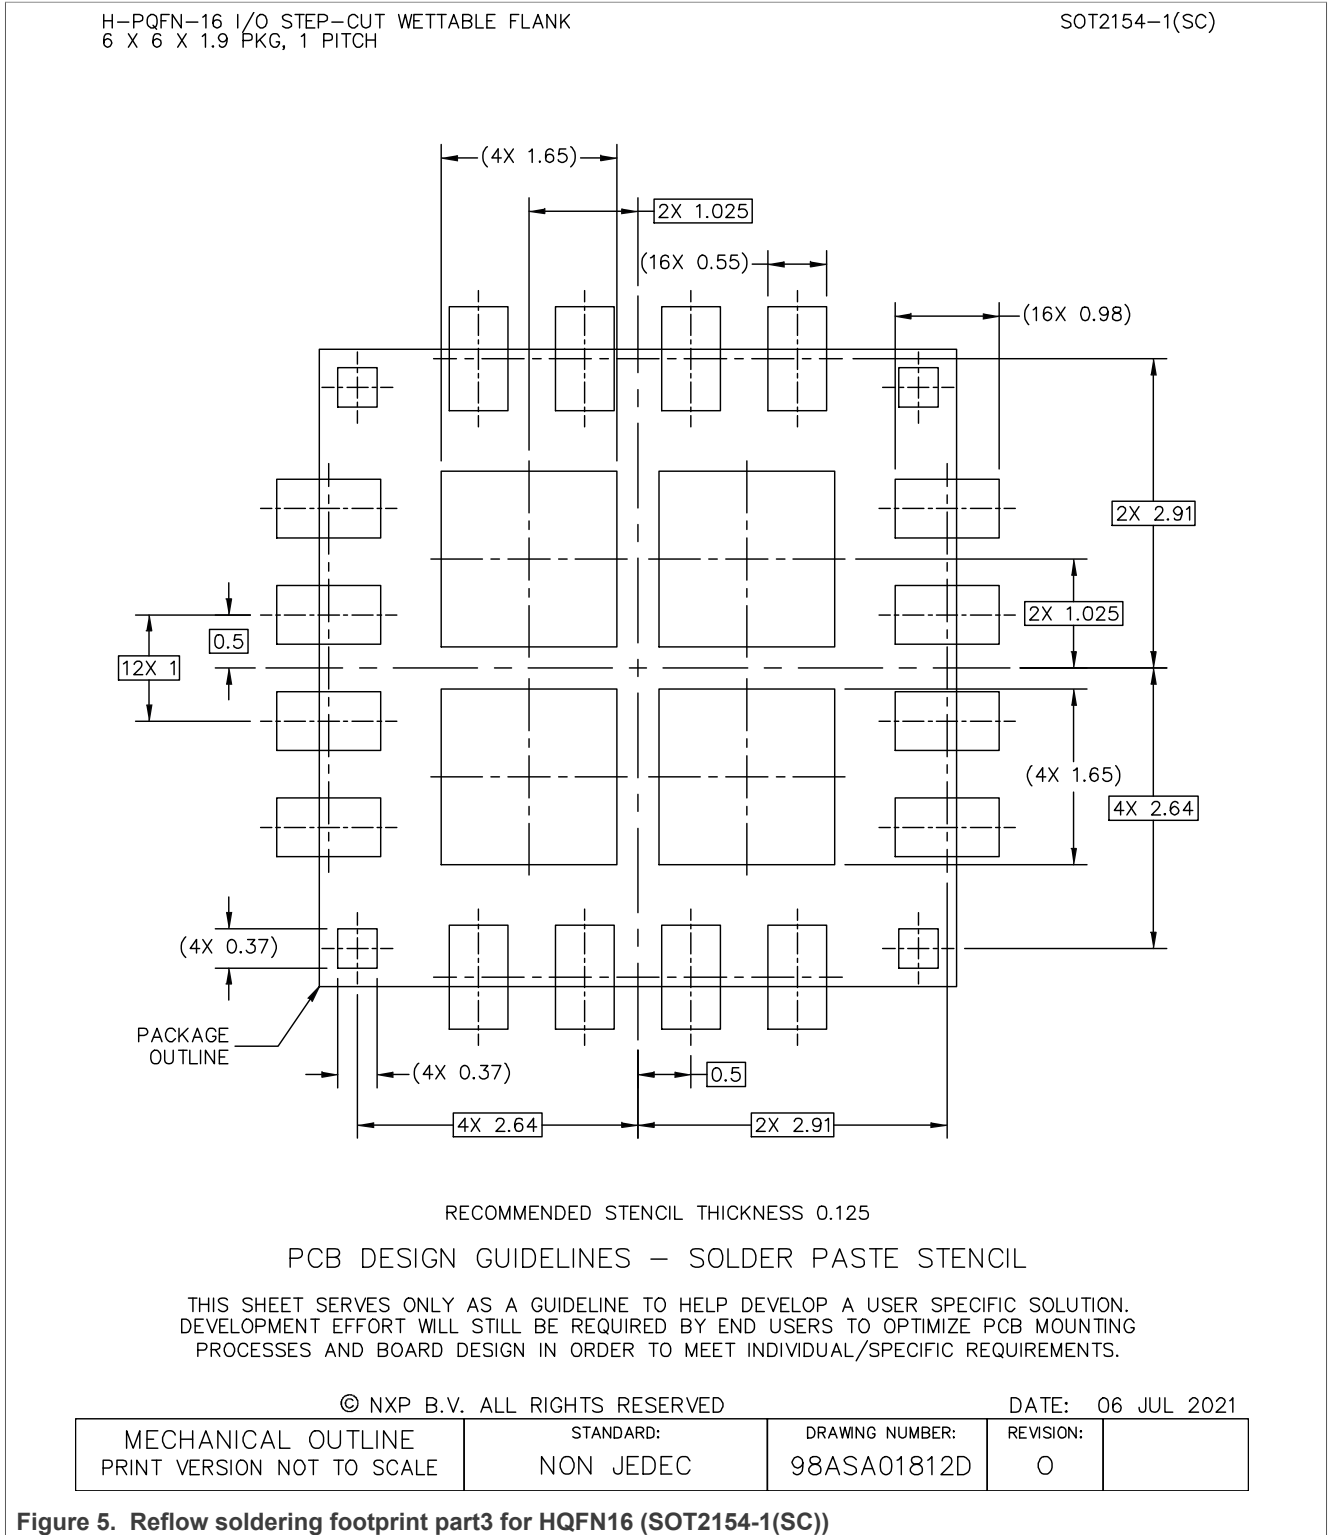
Reflow soldering footprint part3 for HQFN16 (SOT2154-1(SC))
